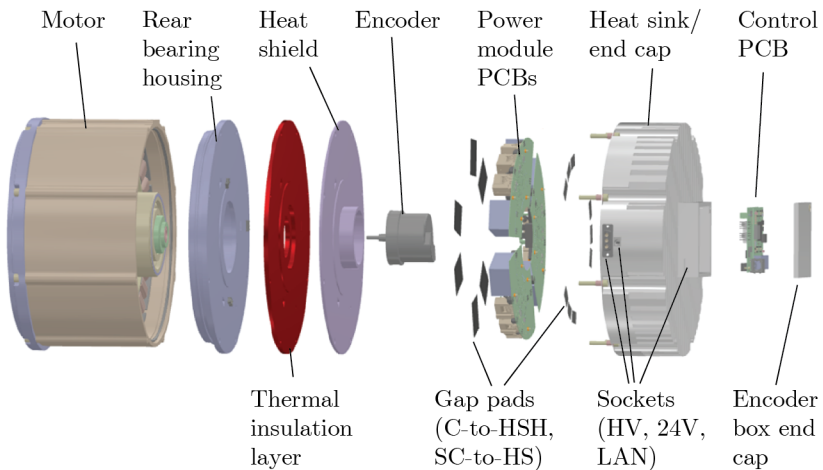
Exploded view of the mechanical CAD model of an IMD based on the specification given in section 6.1, extended by a thermal insulation layer and heat sink fins.
